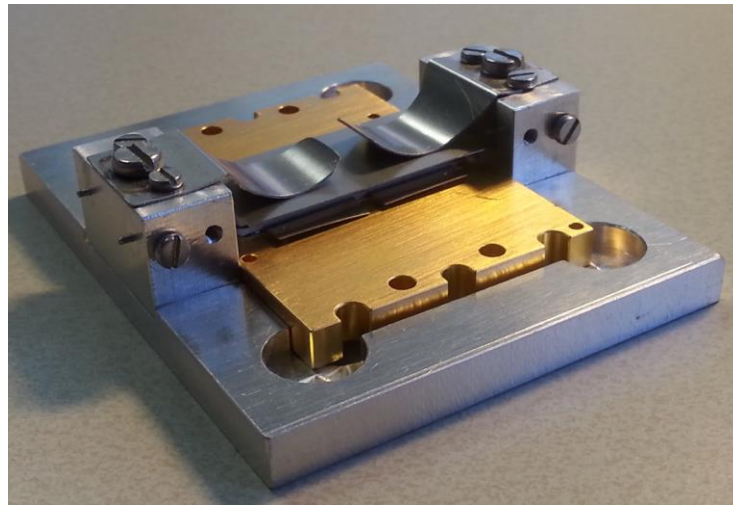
Reflow soldering jig applying uniform load across the transistor cap
